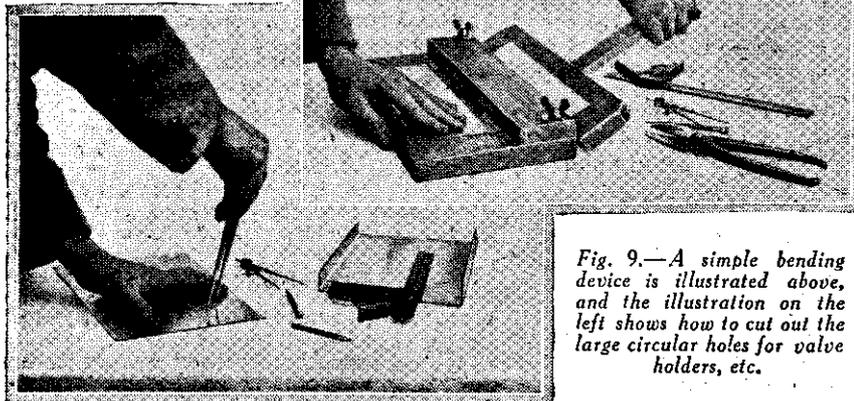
A simple bending device is illustrated above, and the illustration on the left shows how to cut out the large circular holes for valve holders, etc.
